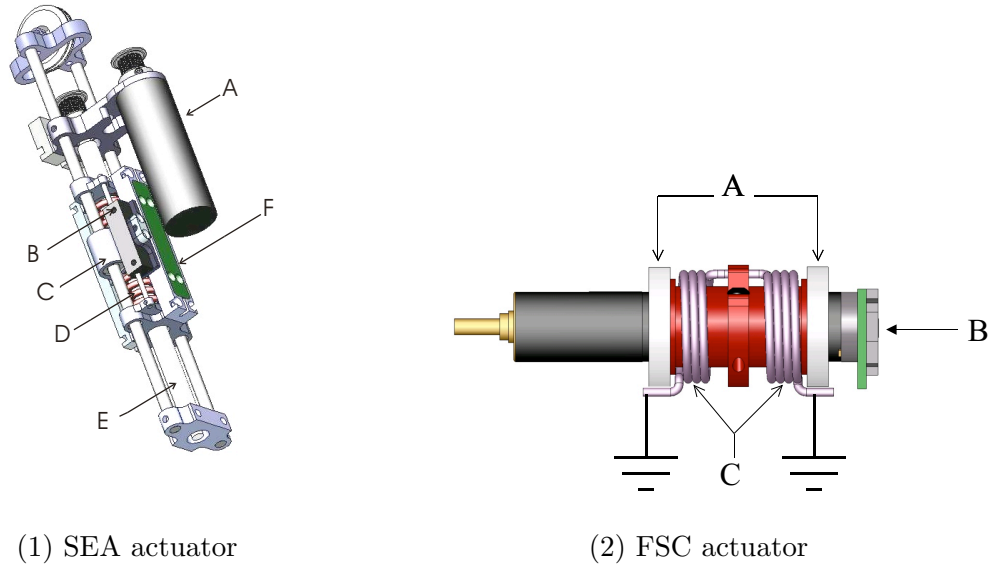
(1) Model of the cable-drive SEA actuator. A brushless DC motor (A) imparts a linear motion to the inner drive carriage (C) through a precision ballscrew (E). The inner drive carriage transmits motion to the outer drive carriage (F) through two precompressed die springs (D). The deflection of the springs is measured with a linear potentiometer (B). (2) A simplified view of the FSC actuator. Two bearings (A) support the motor. The motor is attached to an external frame (ground) through two torsion springs (C). As the motor exerts a torque on a load, a deflection of the springs is created. This deflection is read by the torque sensing potentiometer (B).
